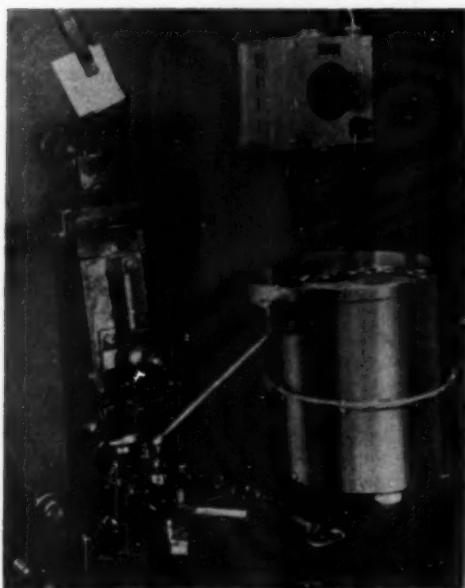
One of the presses fitted with bowl-type Sherwen feeder.
